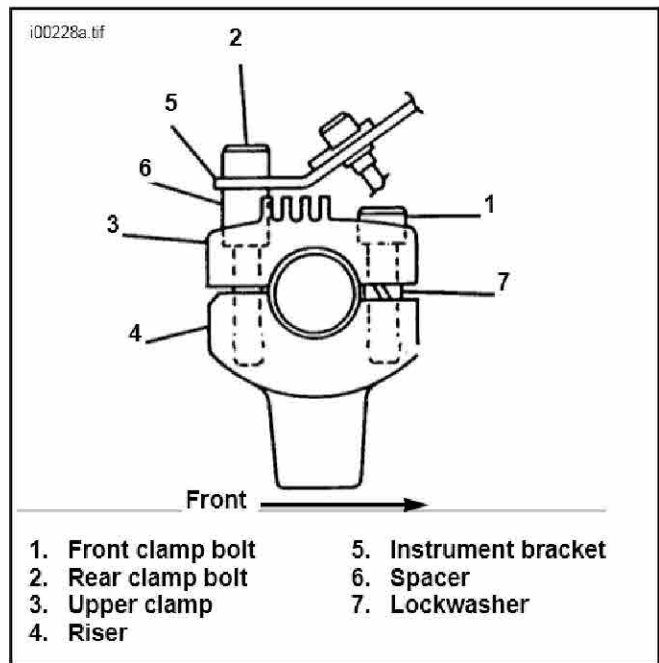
Instrument Bracket Mounting (Dual Instrument Mounting Bracket Shown)
